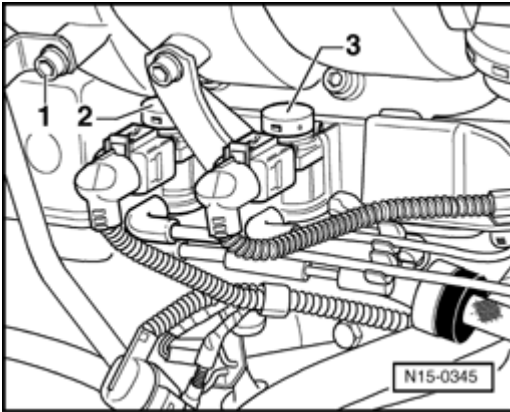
Oil Dipstick Guide Tube, Secondary Air Injection Solenoid Valve & Variable Intake Manifold Valve
